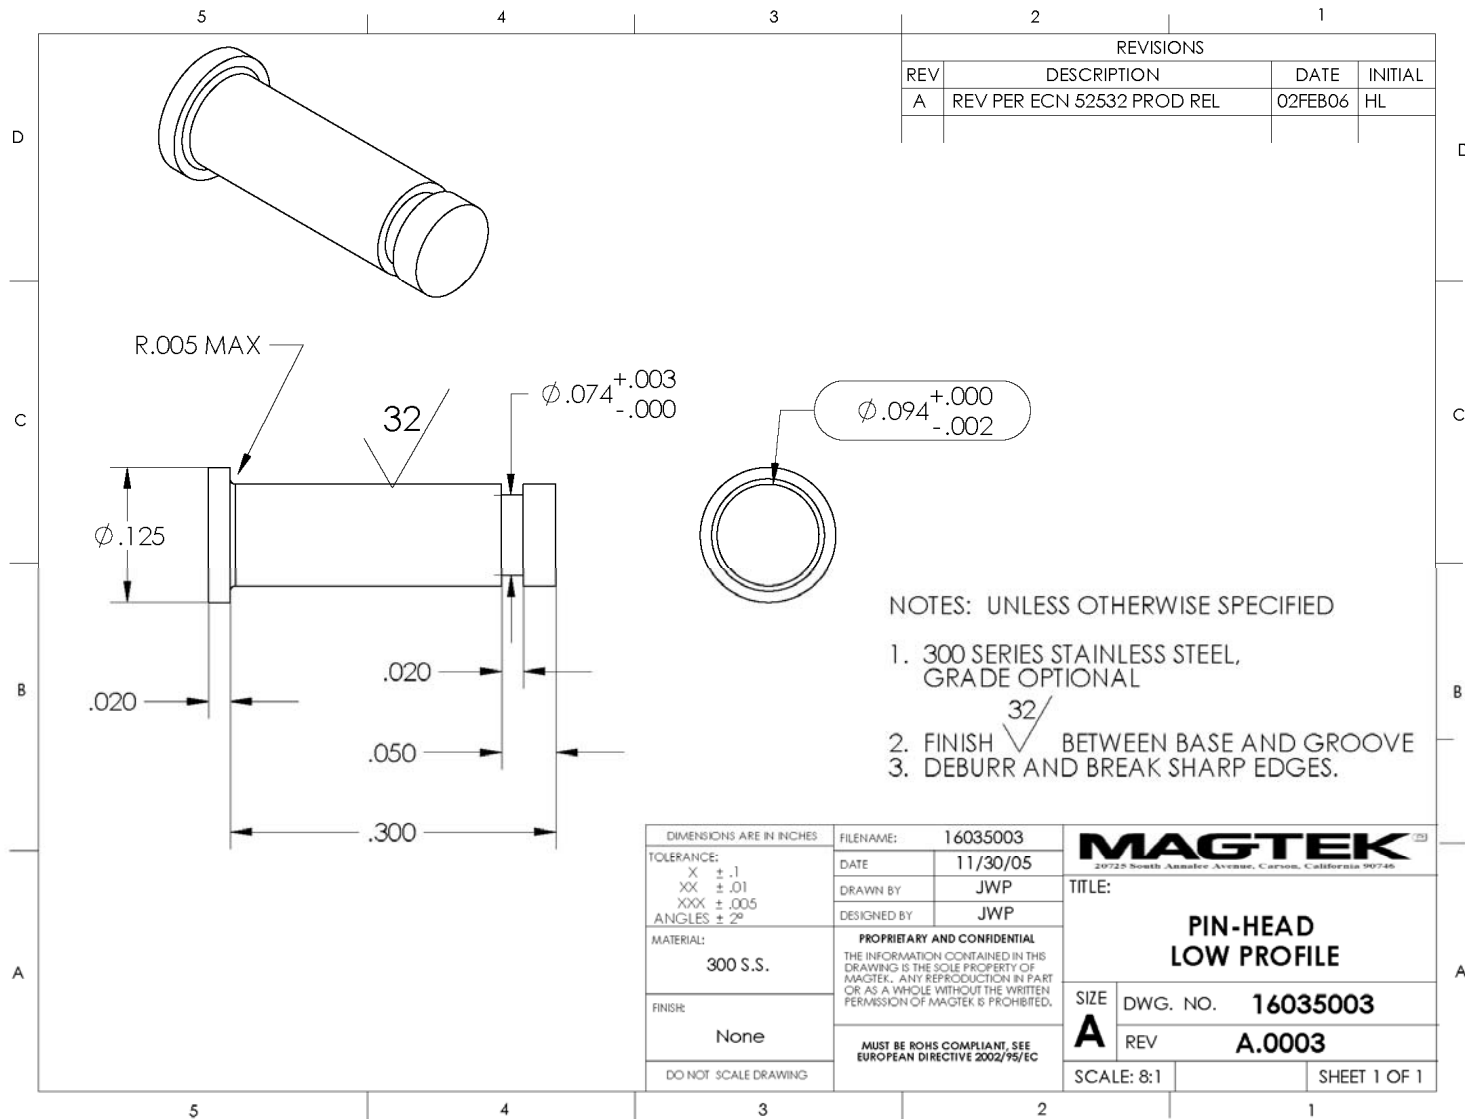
Head Pin (Used for Beam Style Head Mounting)
